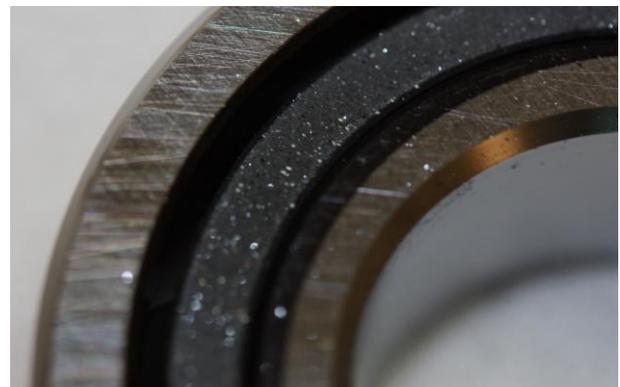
Dusting of MoS_2 debris visible on bearing lands and cage following 35-million revolution life-test
